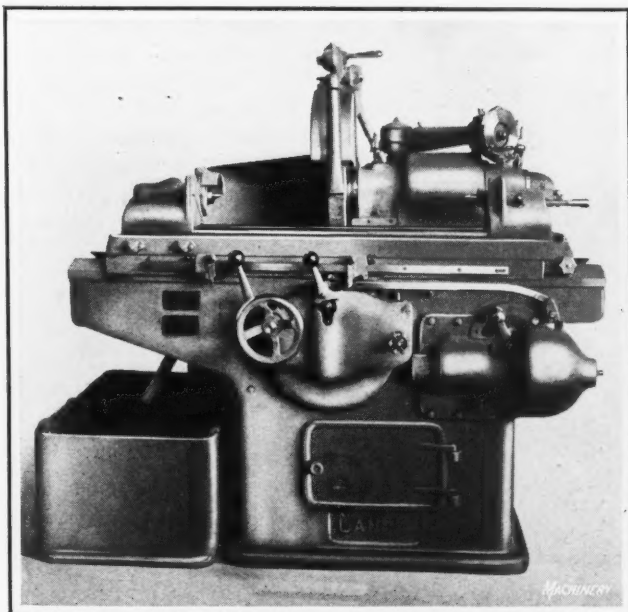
Landis High-traverse, High-production, Hydraulic Grinding Machine
